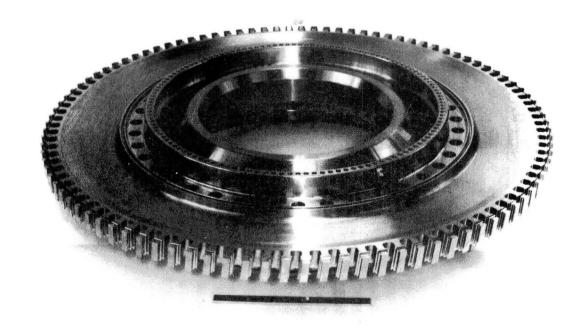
Front View of Finish Machined MERL 76 JT9D First Stage Turbine Disk
